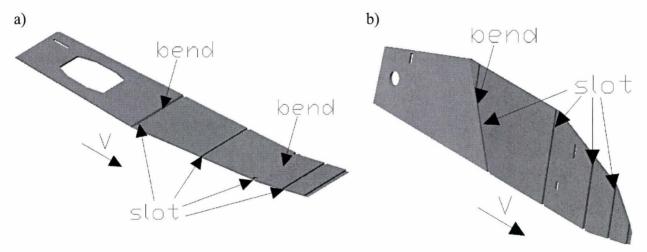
Sandwich panels a) bottom panel b) side panel
